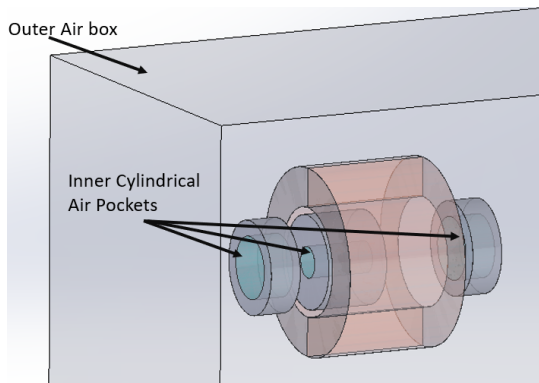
Solidworks model showing the Electromagnetic Spring with the specified air boxes
